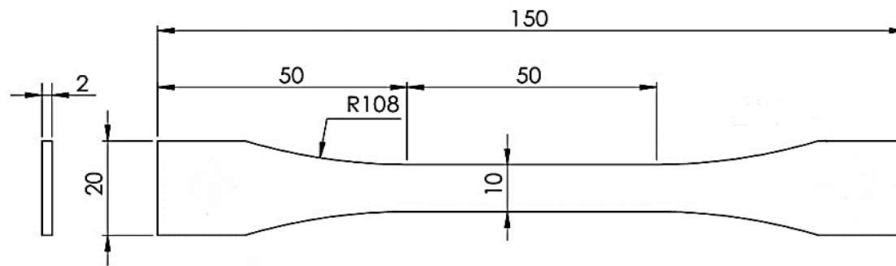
Bulk tensile specimens' geometry according to ASTM D-638 (dimensions in millimeters).
